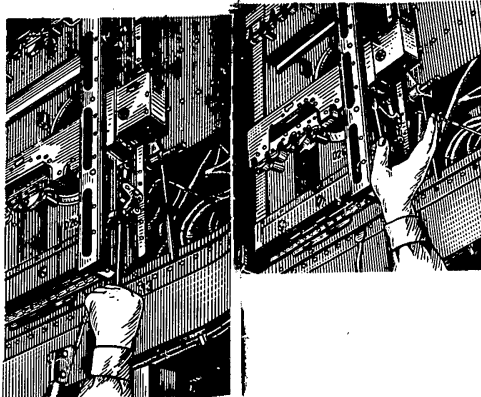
SETTING LATCH GROUP CONTROL HANDLE IN UNLOADING POSITION
